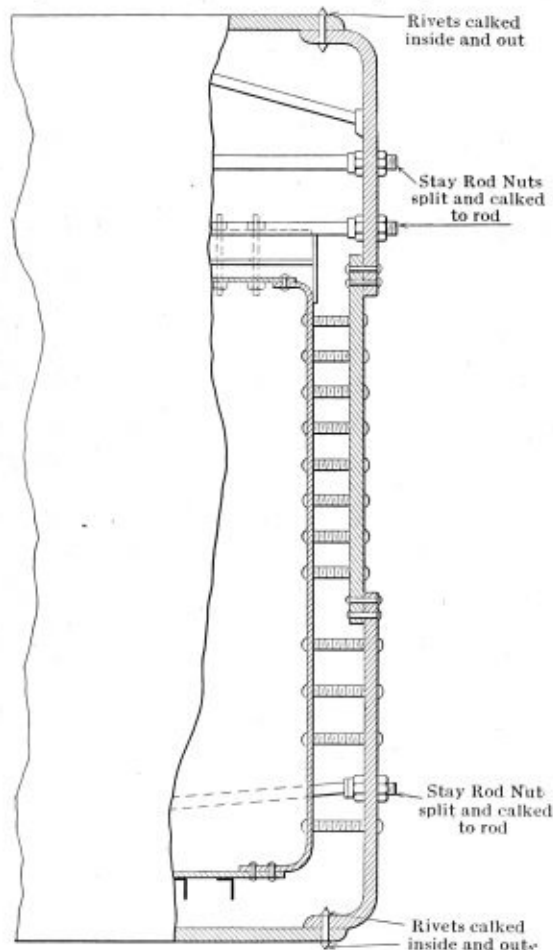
Side View of Boiler, Showing Defective Staybolt Nuts and Rivets
